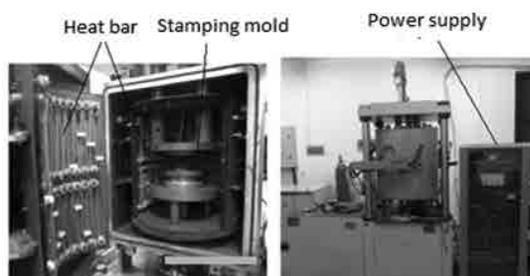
Heating model through a heating cabinet fitted with mold sets and stamping machines [10]
